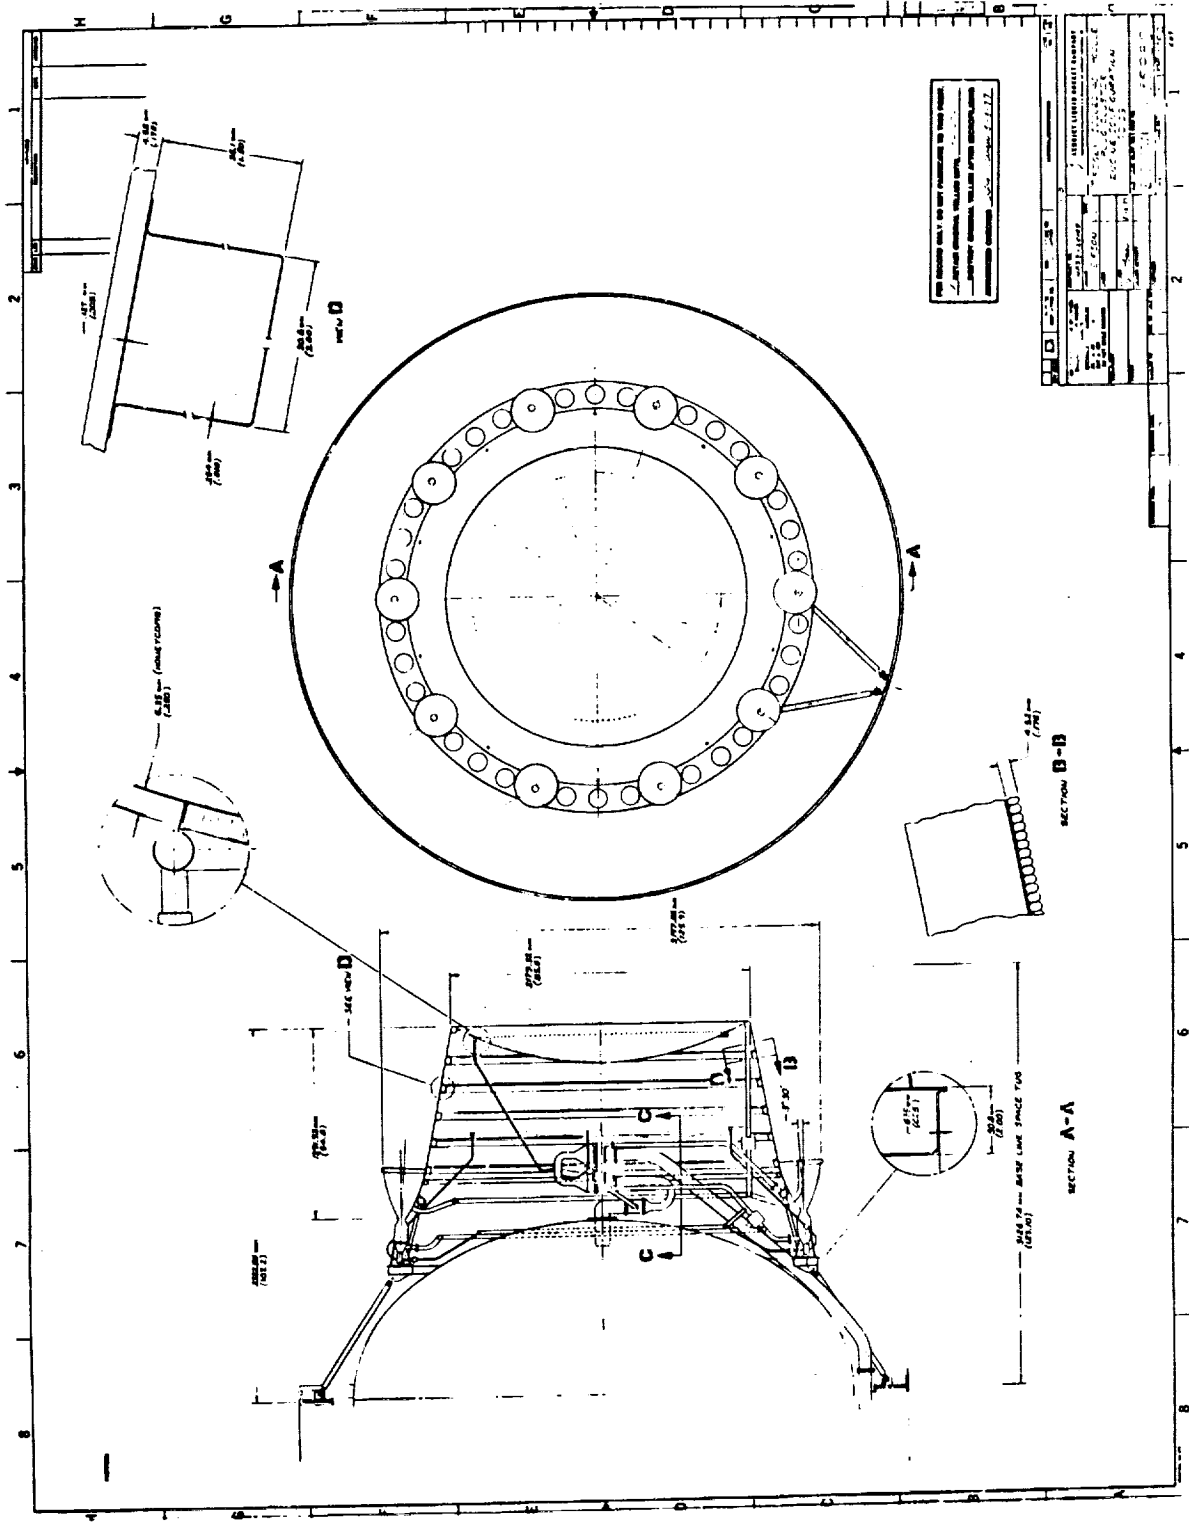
Regen-Cooled 40:1 Module Plug Cluster Engine Configuration GG03, Dwg No. 1185980 (Sheet 1 of 2)
